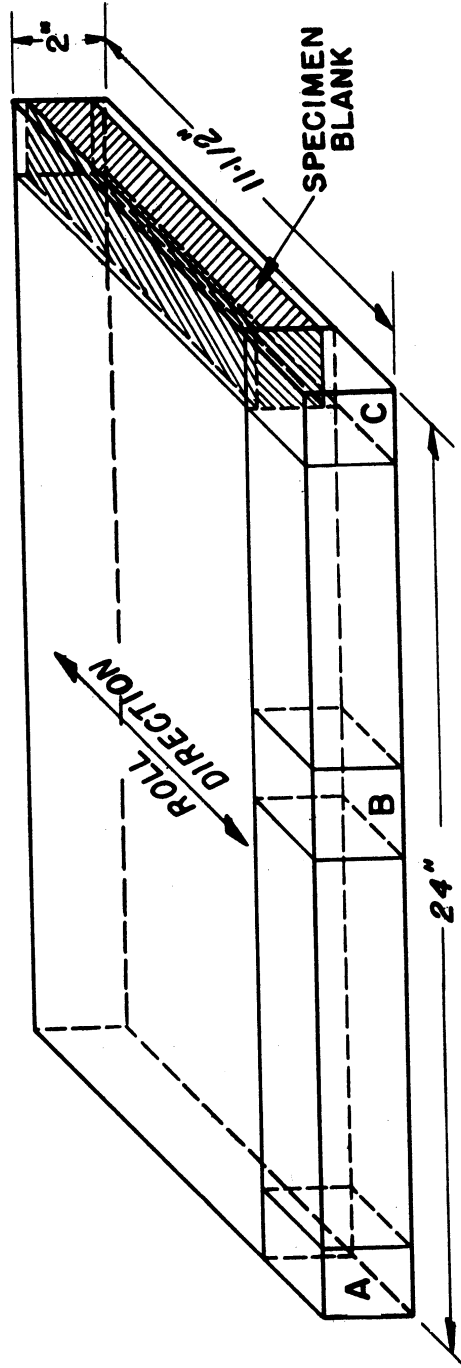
ALUMINUM ALLOY PLATE STOCK, SHOWING TYPICAL CUTTING OF SPECIMEN BLANKS AND METALLOGRAPHIC SAMPLES A, B, C.
